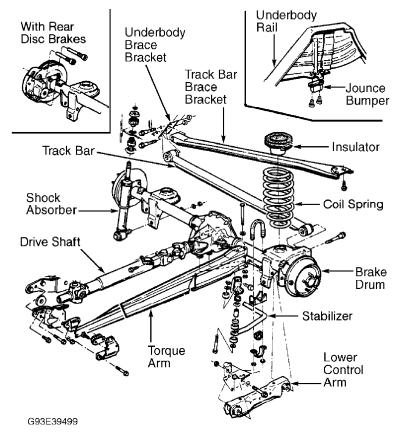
Exploded View Of Rear Suspension Courtesy of General Motors Corp.
